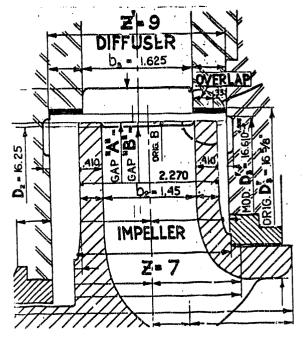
Misaligned rotor toward inboard. Gap "A" ineffective on discharge side. Drastic increase of axial thrust. Thrust bearing will fail on the active side.
